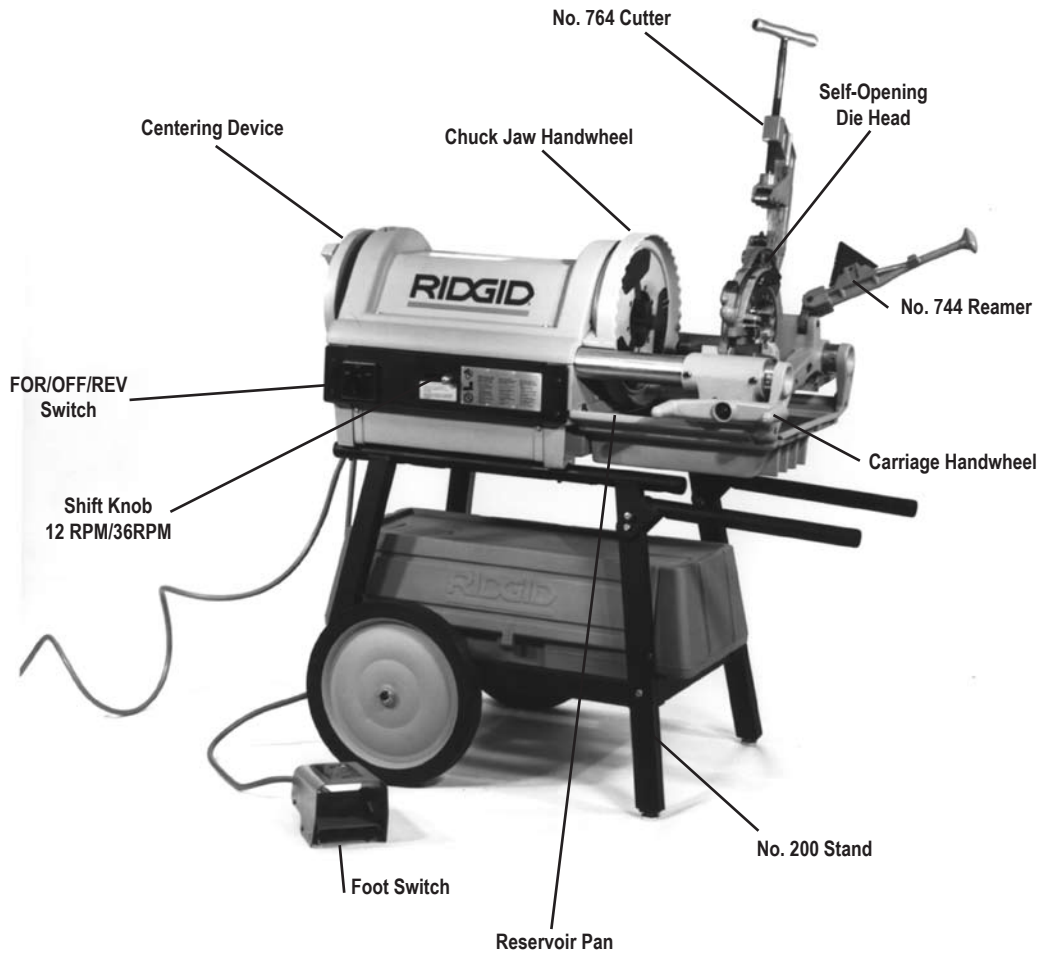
No. 1224 Pipe and Bolt Threading Machine
